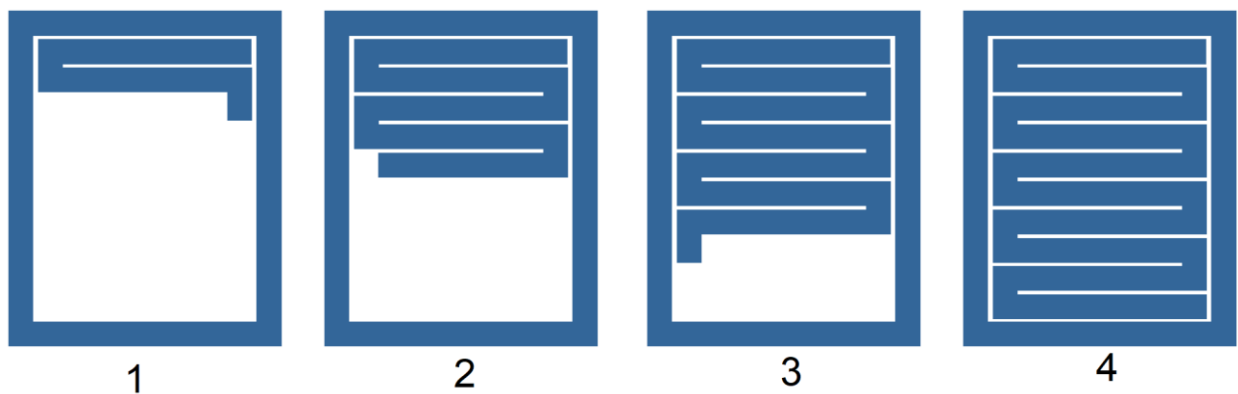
Sample toolpaths used to produce a simple geometry part, such as a tensile specimen. (1) through (4) show the progression of infill deposition.
